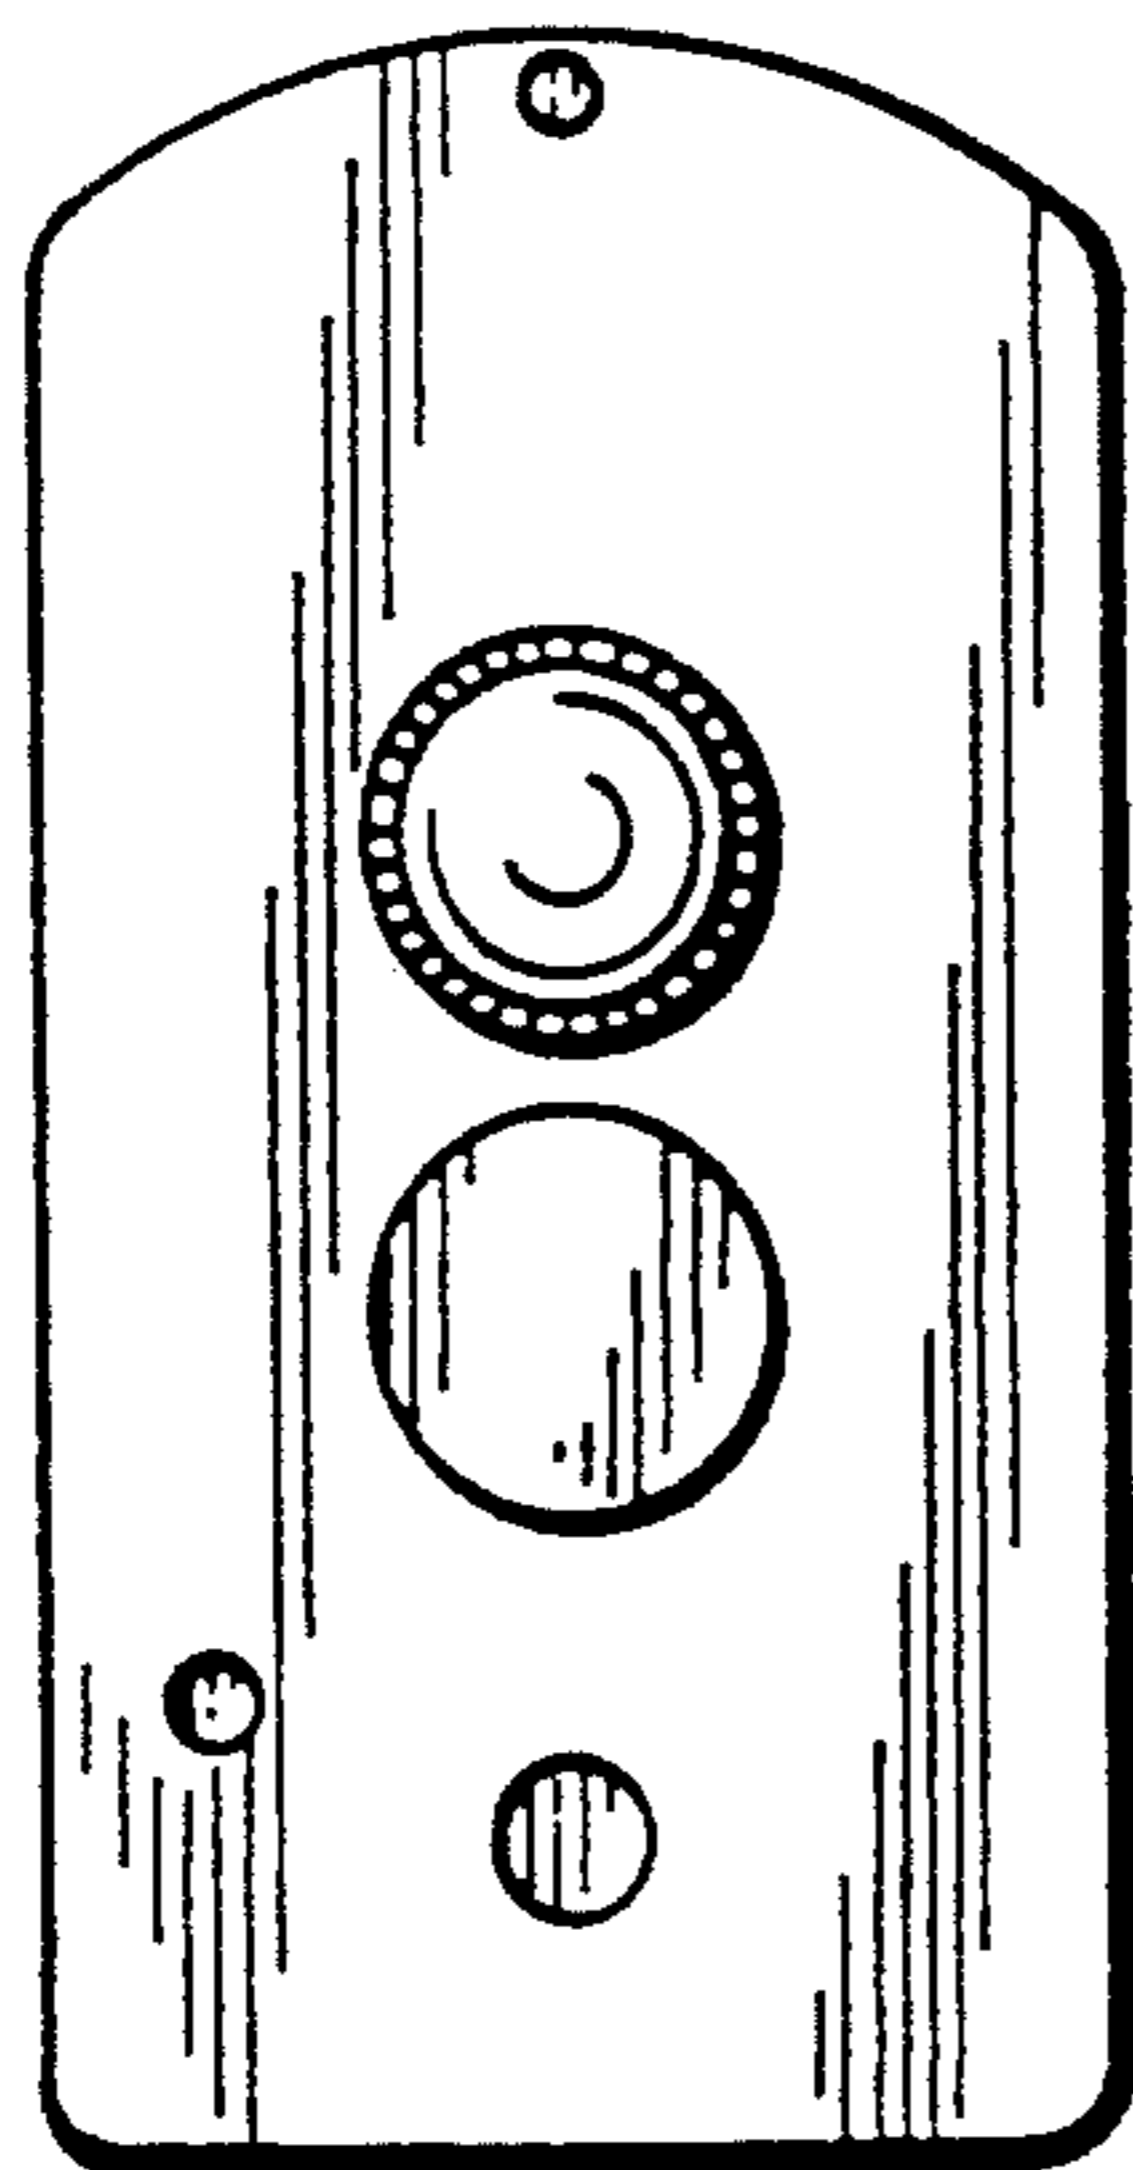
is a front elevational view of a winding gear showing my new design;
